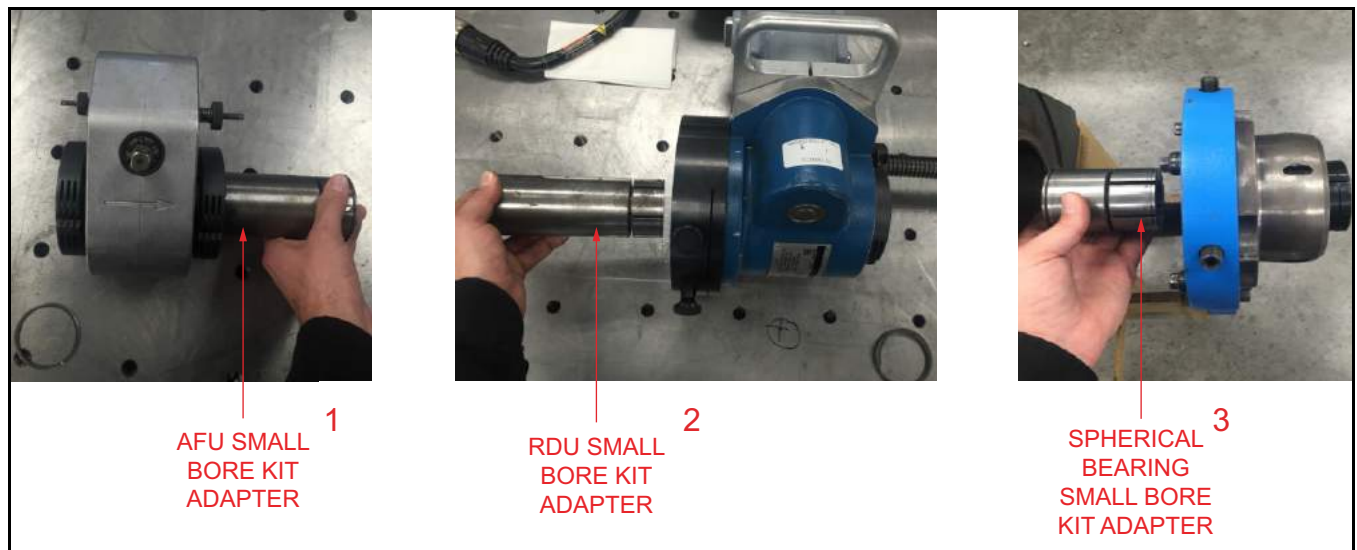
SMALL BORE KIT ADAPTER INSERTION
